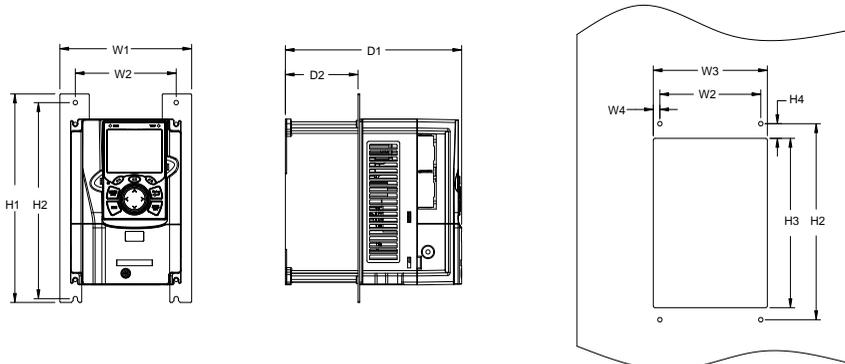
Flange mounting diagram for 380V 1.5–75kW models
